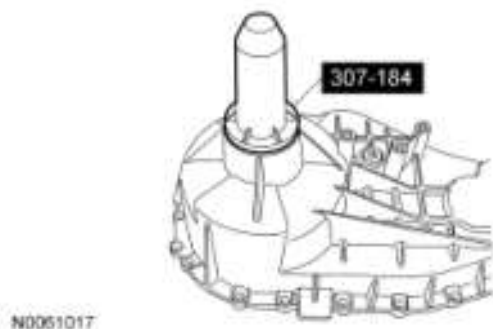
Installing Yoke-To-Flange Seal Using Special Tool (307-184)
